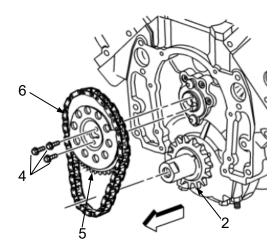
Camshaft Sprocket (5), Sprocket Retaining Bolts (4), Timing Chain (6)
